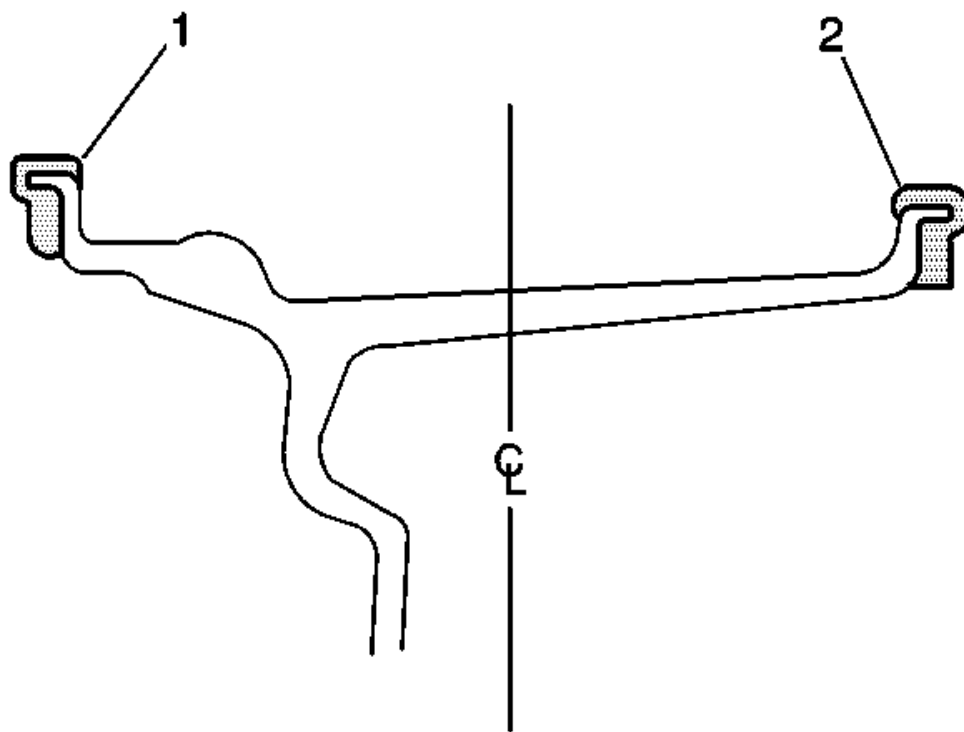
View Of Wheel Weight Placement - Static Balancing
